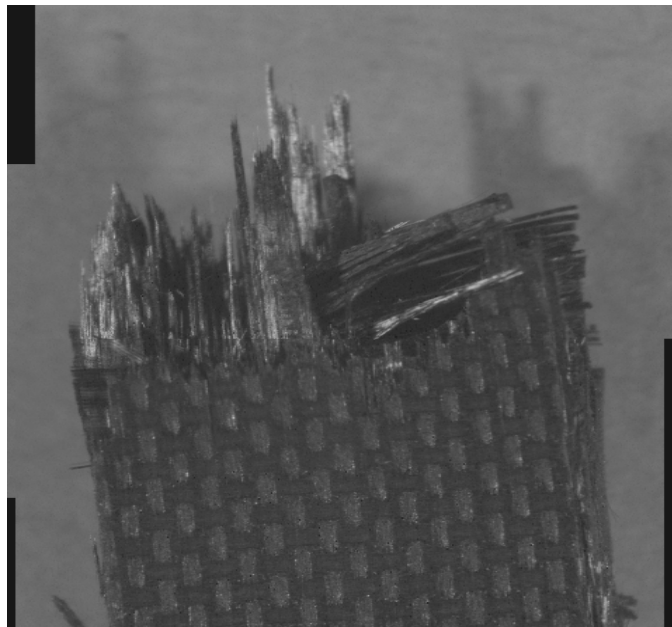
the bottom left side of the [0/90] IM7/ BMI 5250-4 specimen showing a close up view of the fiber fracture and pull out when subjected to tensile load to failure at 191°C
